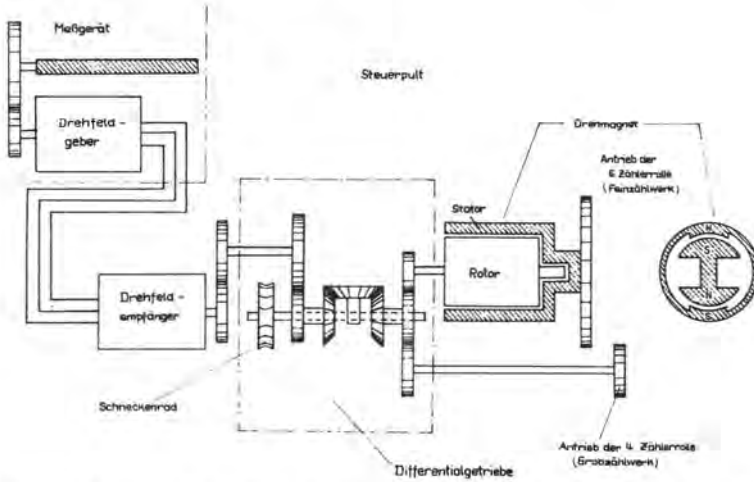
Diagram of gearing (section) of the Control panel. 1 Rotary magnet, drive of the 6th counter roller (fine-counting mechanism), 2 Stator, 3 Rotor, 4 Drive of the 4th counter-roller (coarse counting mechanism), 5 Differential gear, 6 Worm gear, 7 Rotary-field receiver, 8 Rotary-field transmitter, 9 Measuring instrument.
